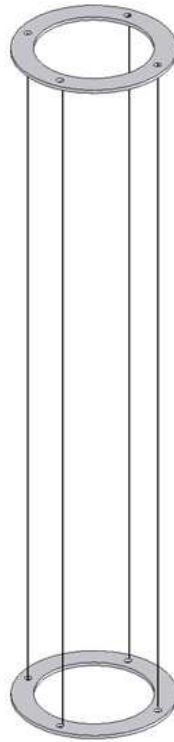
Hard plastic made by HDPE rods as the support structure, skeleton, of the support column. Connection rings are shown to how to fixed the whole structure. Dimensions are shown on technical drawings and given in appendix B with Part number 4
